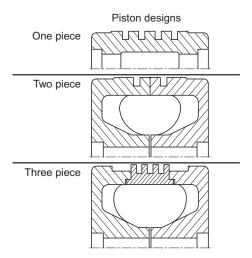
Piston designs. Courtesy of Dresser-Rand.
